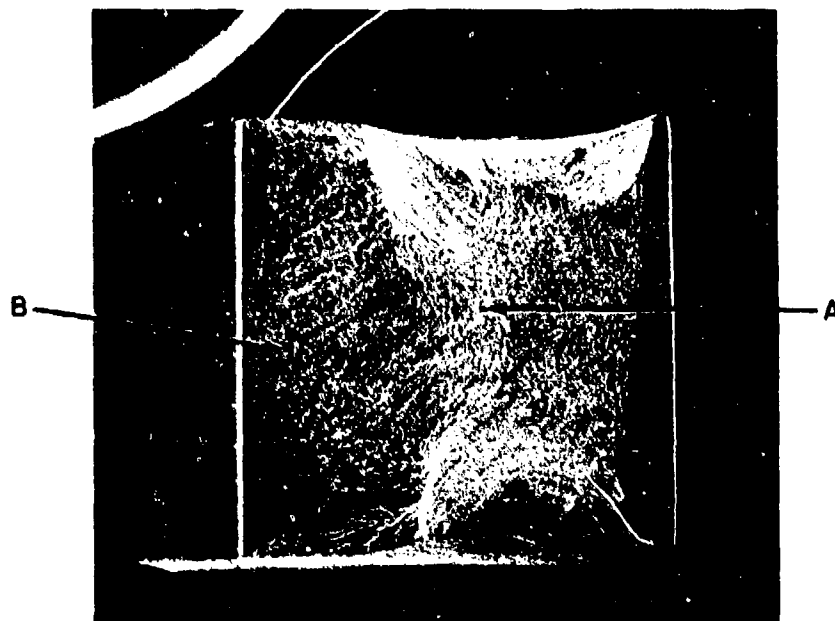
Fatigue fracture surface of an A-514 weld specimen, 11x.
